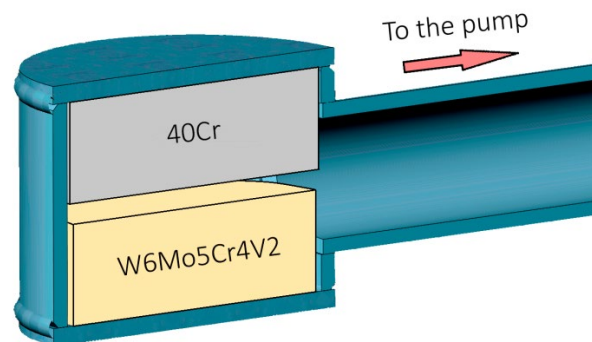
Vacuum sealed holder for arrangement of the 40Cr and W6Mo5Cr4V2 discs applied for their diffusion welding.
